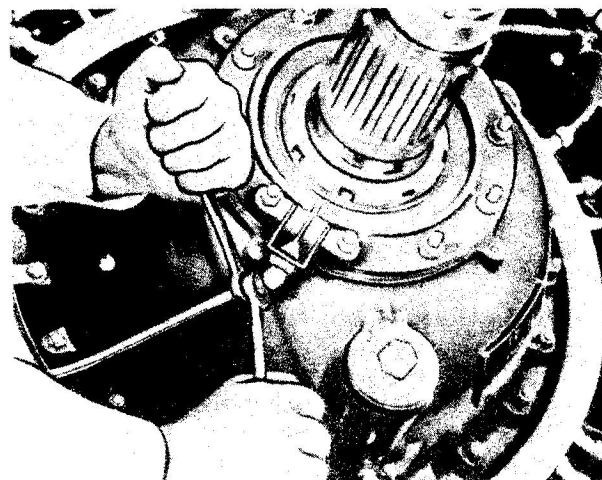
Connecting Feeder Tube Fluid Supply Pipe
